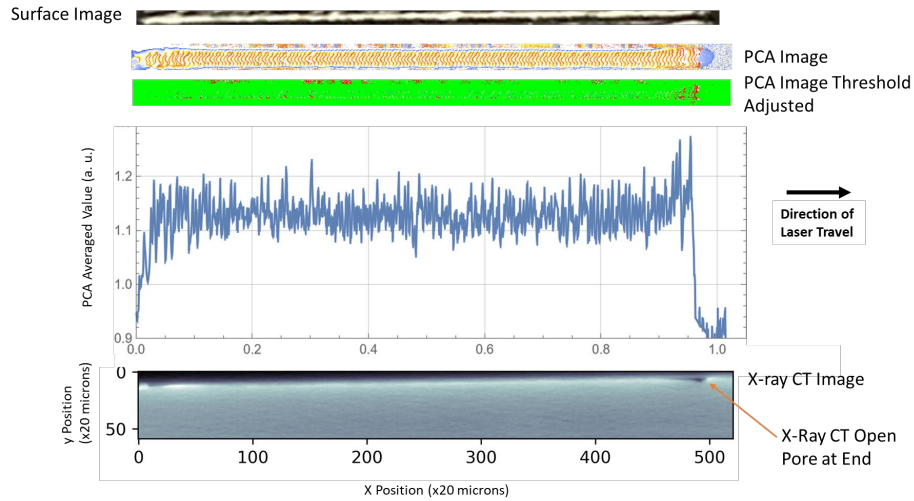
Weld #169 laser power = 325 watts, laser speed = 598, mm/sec, open pore at end detected.
